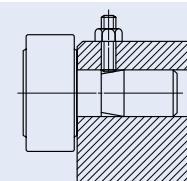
Mounting example of Easy Mounting Type Cam Follower
